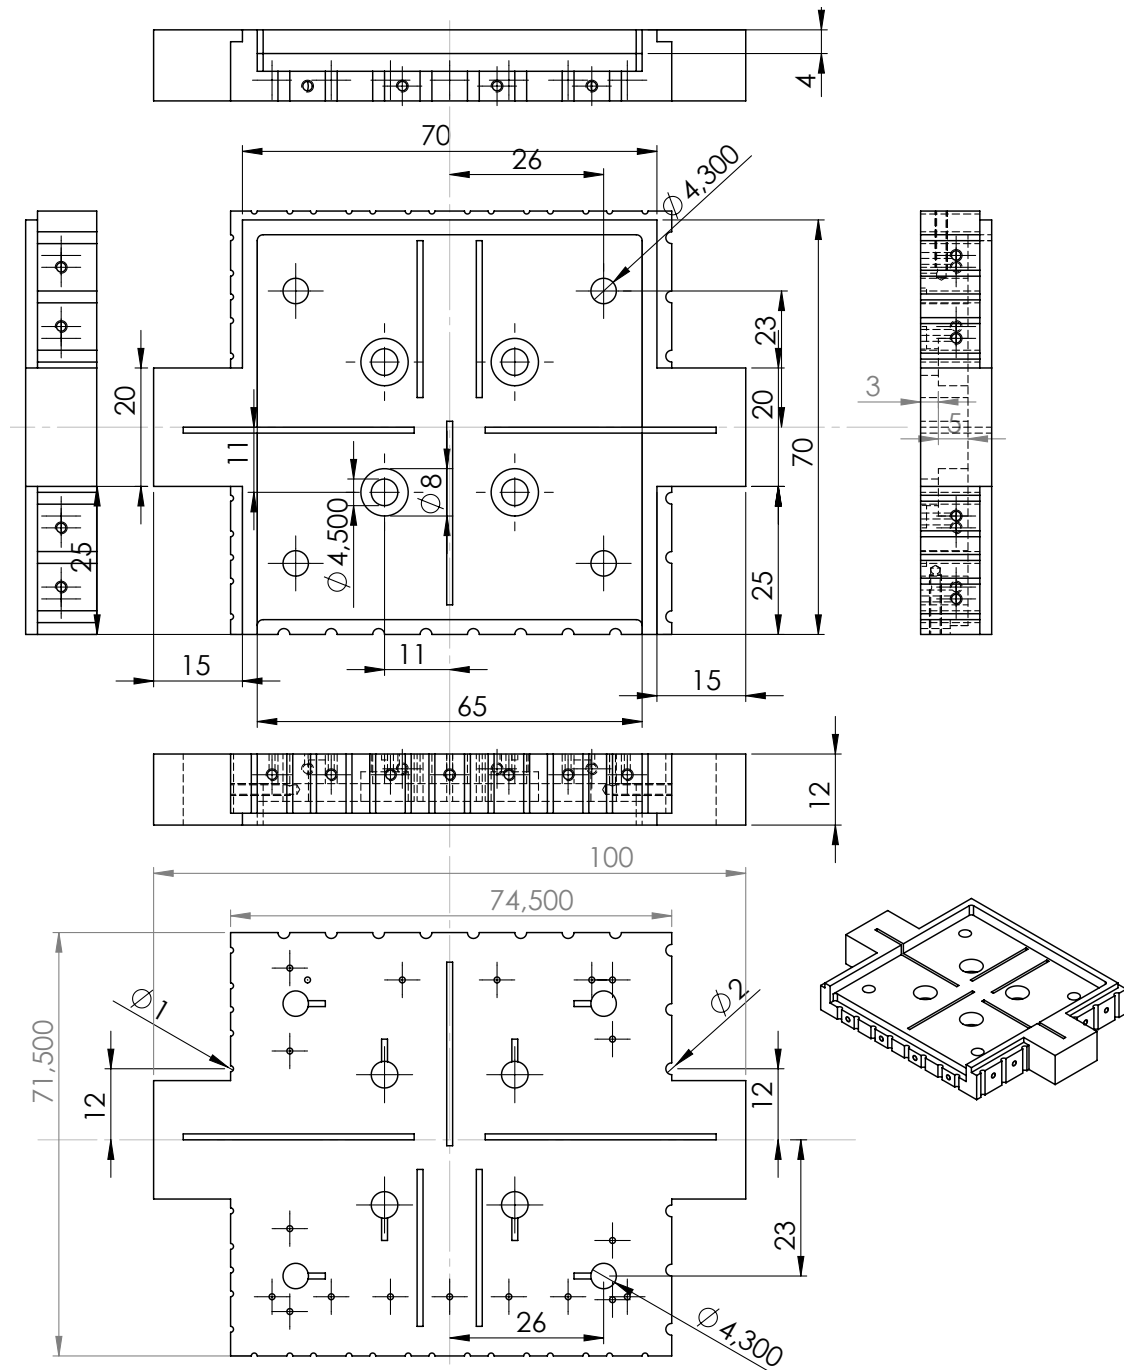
Technical drawing of the central piece, the copper block (Sheet 1 of 3).
